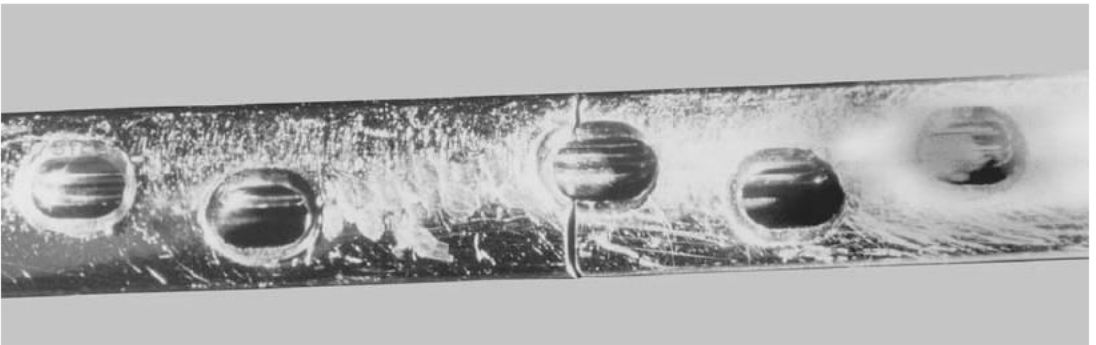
Austenitic stainless steel 316L plate, visibly fractured
